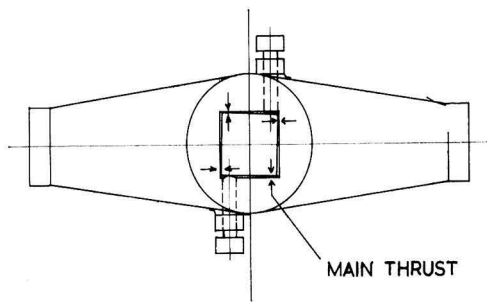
Use of jacking screws for fixing cross arm to shaft.
